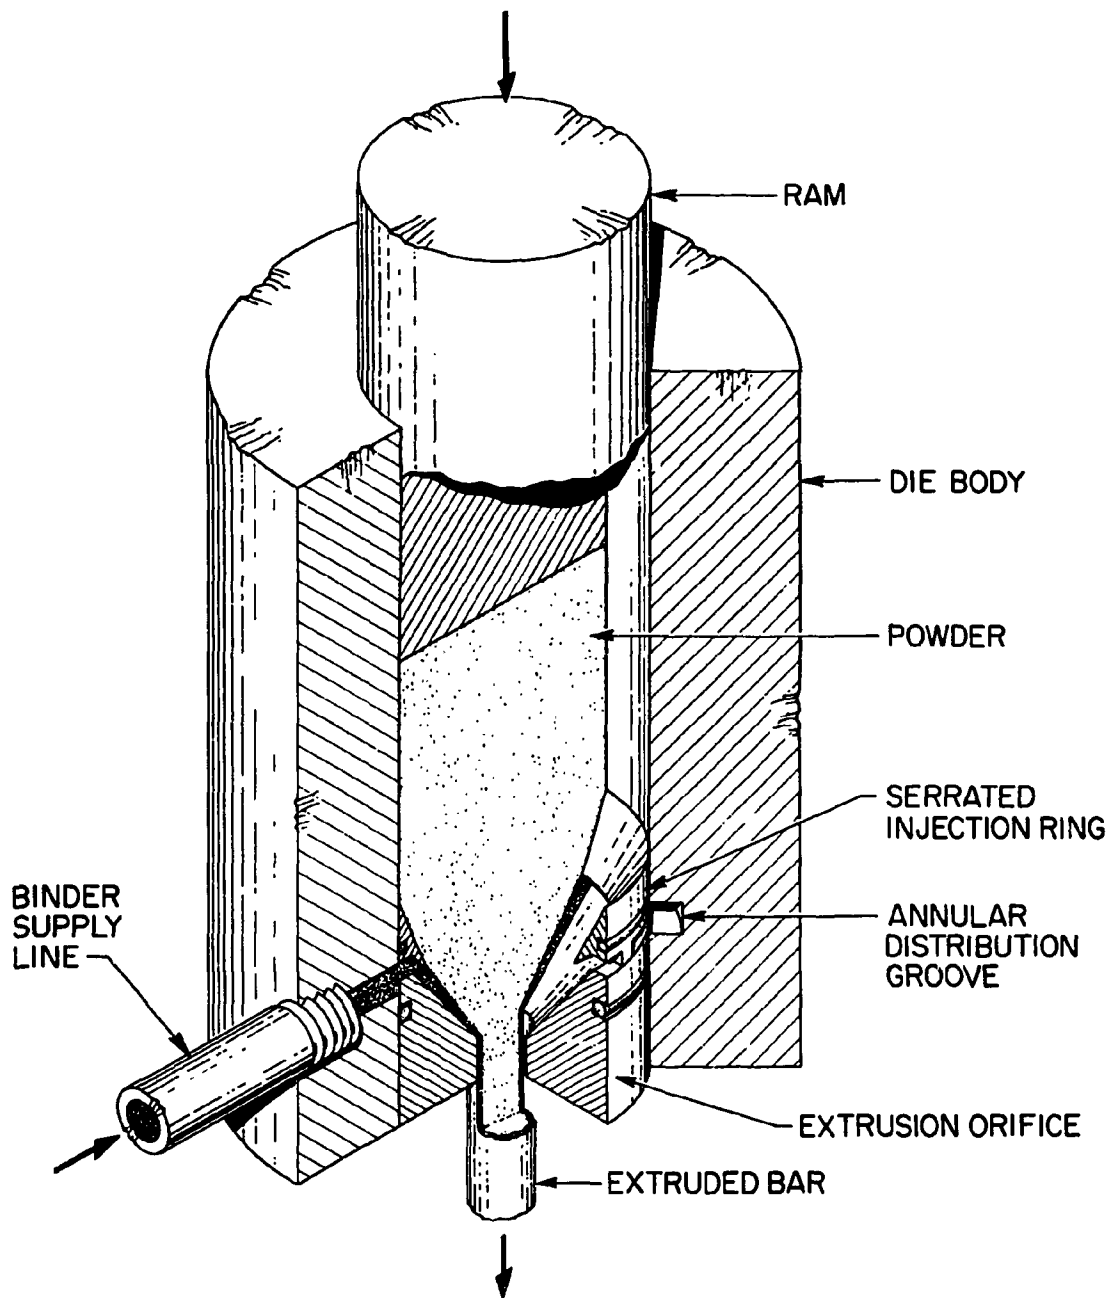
Conceptual Design of Binder Injection Extrusion Die Assembly
